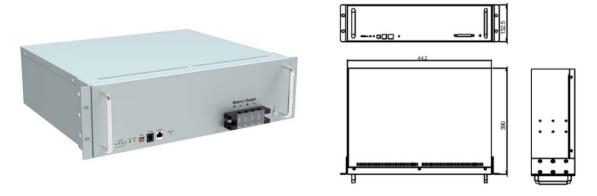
Appearance and Mechanical Drawing of U3C-50P-48V-A
